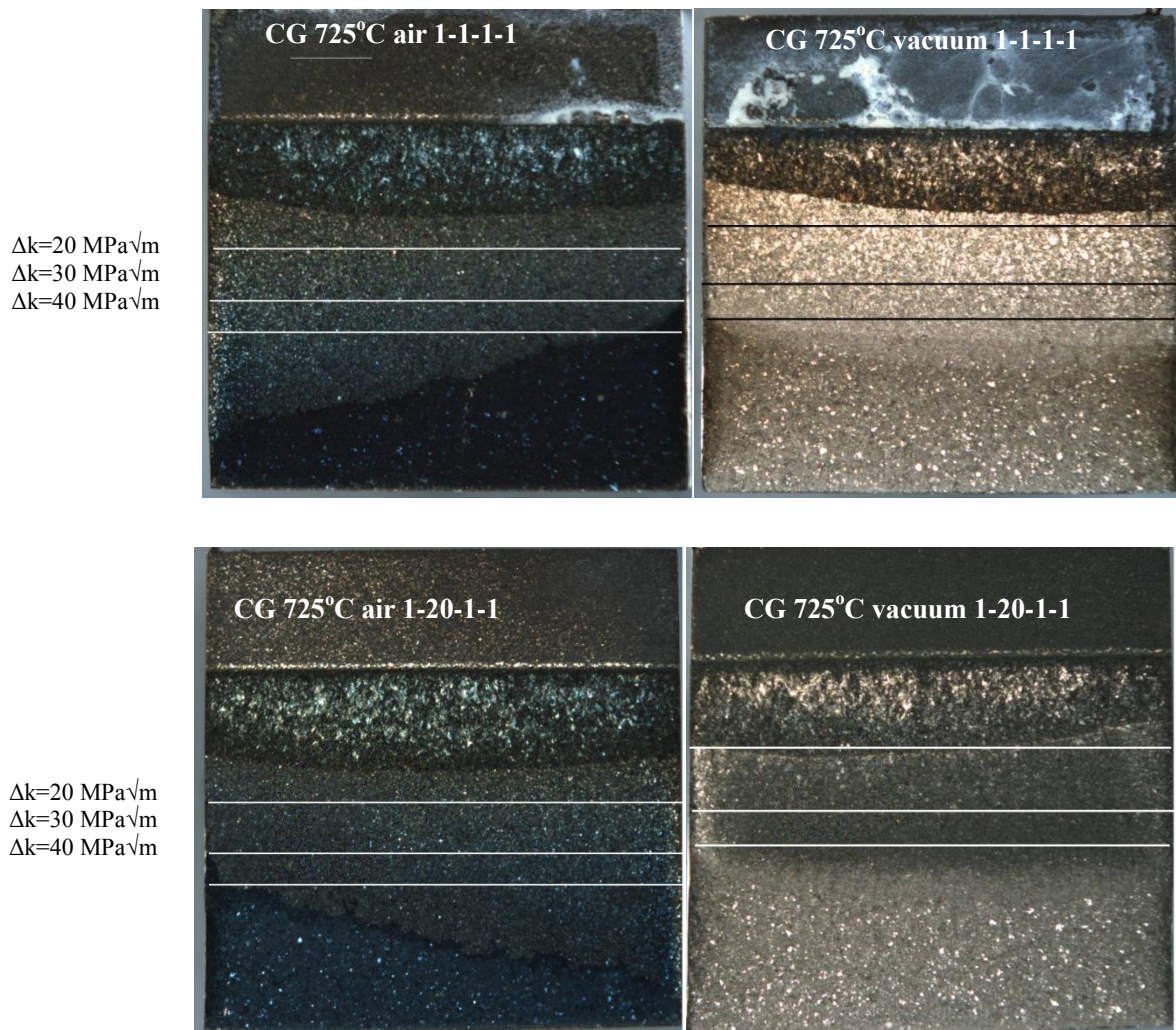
Optical overview of fracture surface of the CG LSHR alloy tested at 725 °C.
